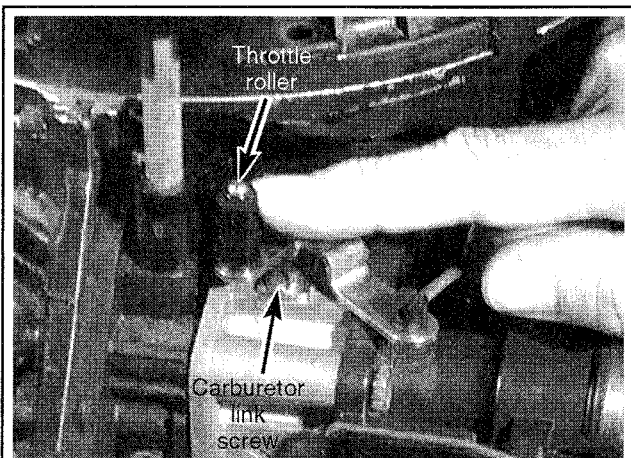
Light pressure on the roller should hold the throttle plates/linkage closed while tightening the shaft connector and link screws
